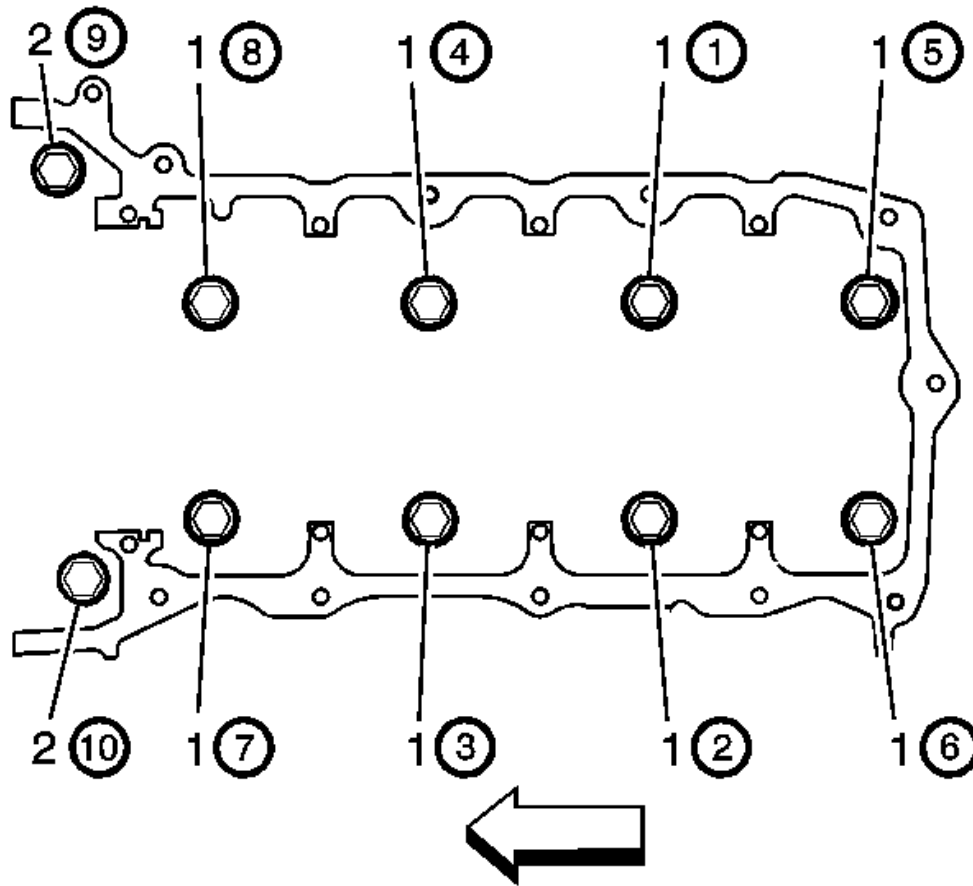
Identifying M11 Cylinder Head Bolts & Tightening Sequence
